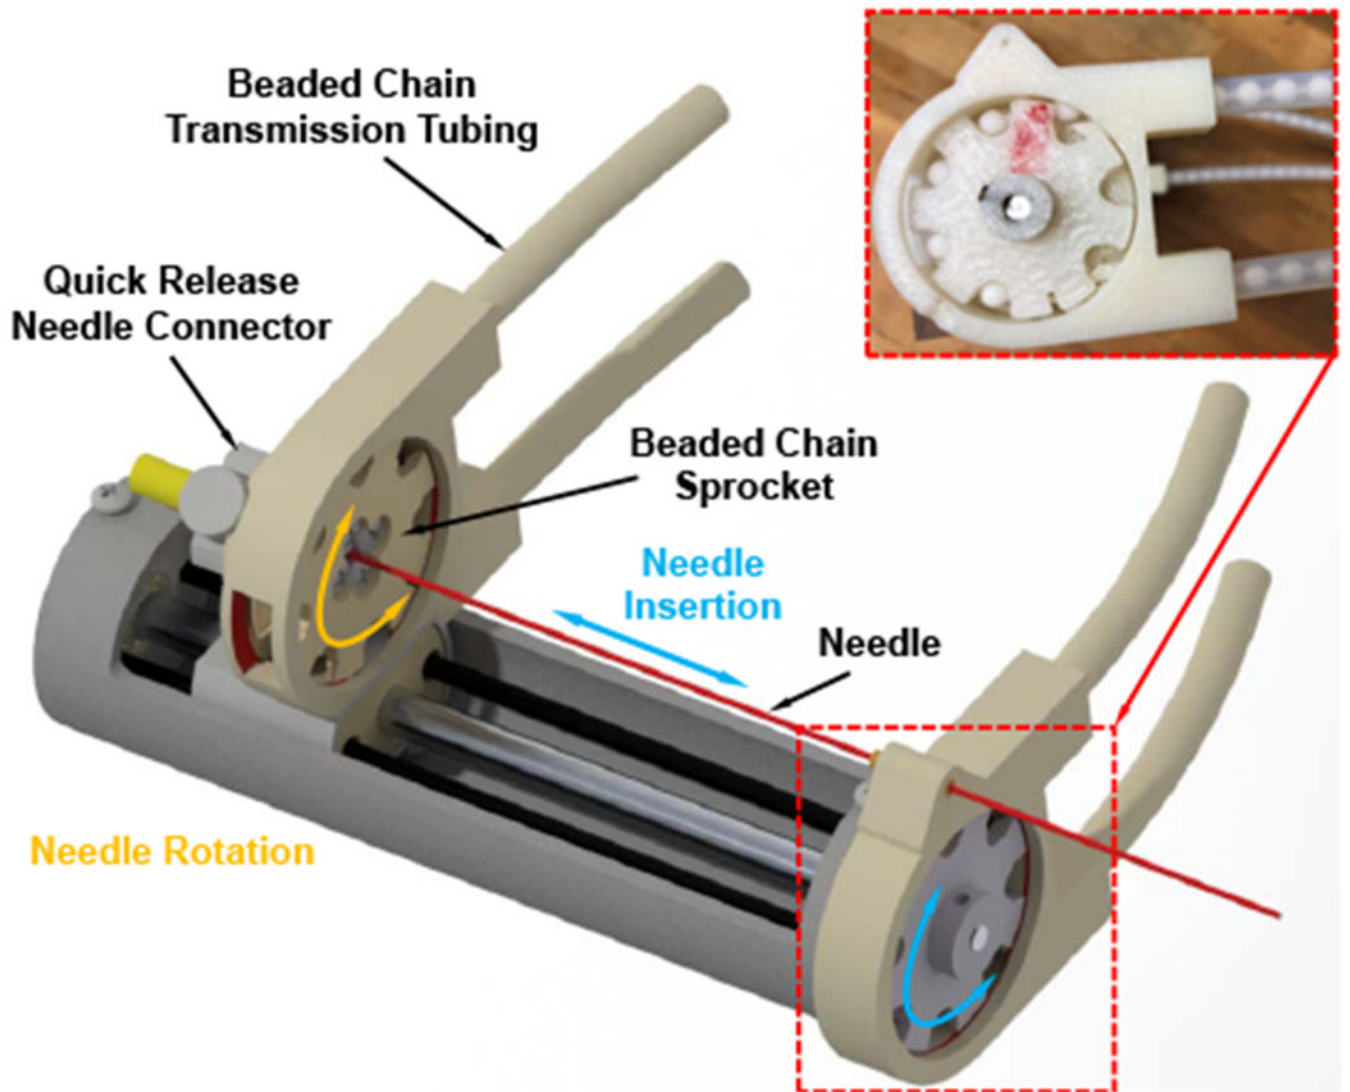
CAD model of the 2-DOF needle driver module, showing the major components and motions. Inset: prototype assembly of the beaded chain, sprocket, and nylon tubing.
